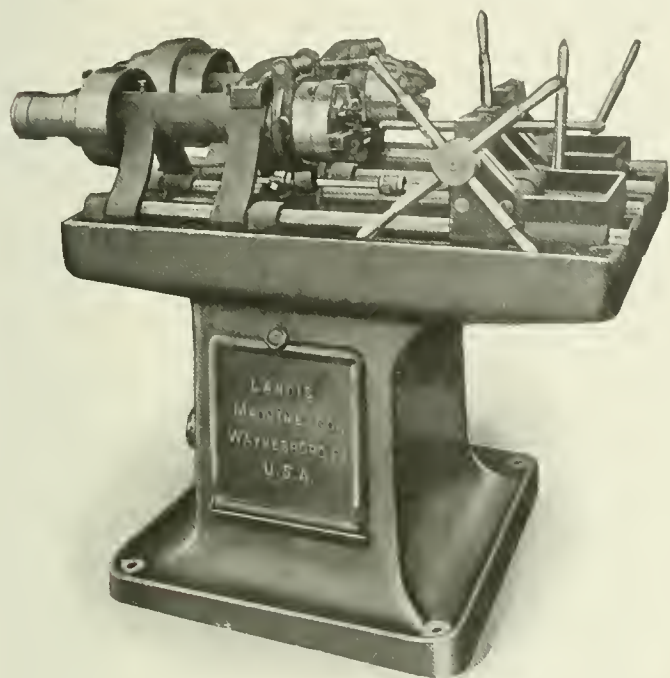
Landis 1/2-inch Double-head Bolt-cutting Machine
